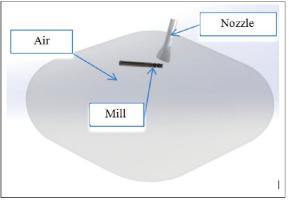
Model of the system: mill, device for coolant supply and working zone of the machine with coolant and ambient air
